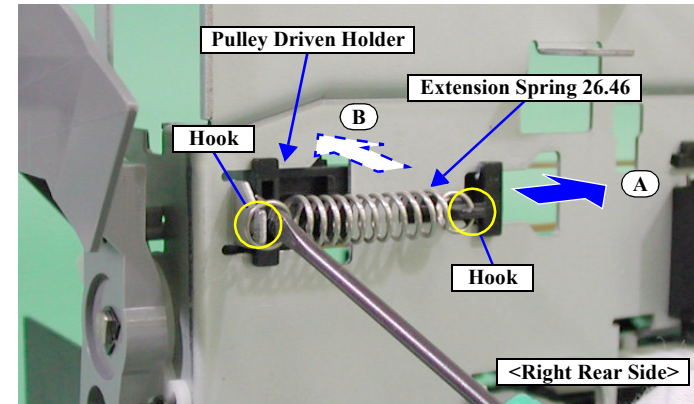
CR Guide Shaft/Carriage Unit Removal 1
